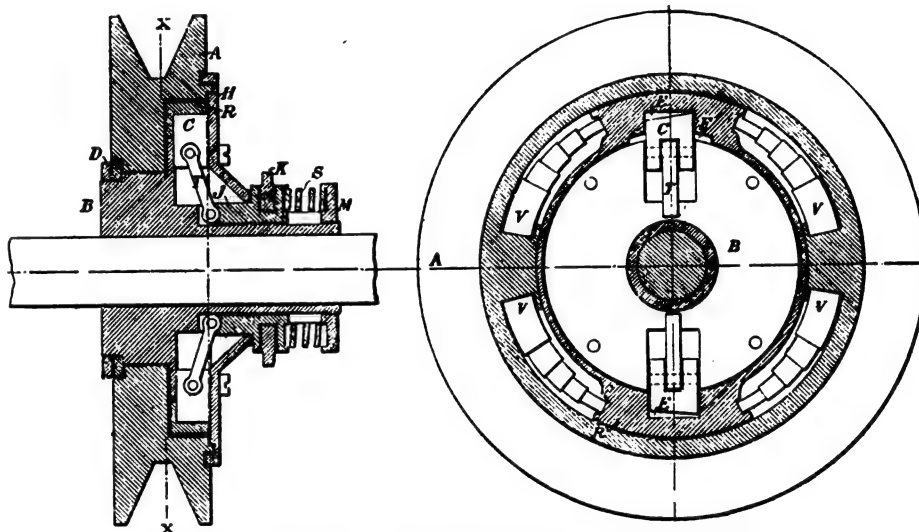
SECTIONAL SIDE AND END ELEVATION OF CLUTCH.
